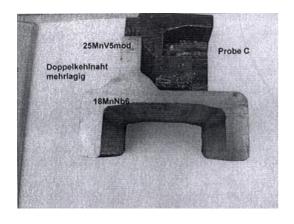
Profile of 25 MnV5mod and 18MnNb6 multiple-layering double-fillet weld
